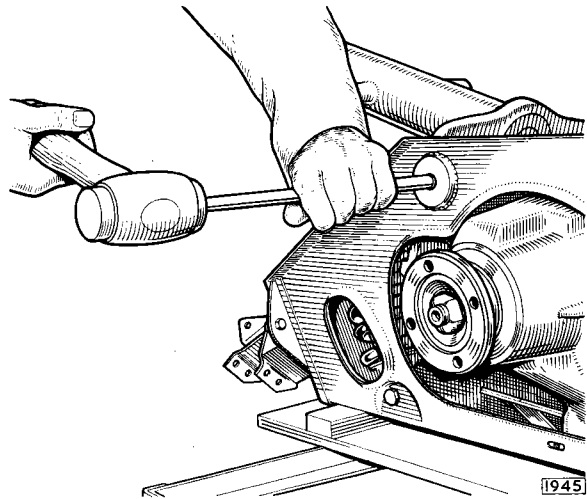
Drifting the inner fulcrum shaft into position and displacing the dummy shaft
